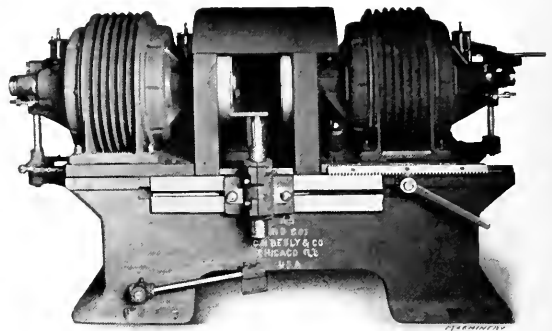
Front View of Besly Double-spindle Motor-driven Ring-wheel Grinder
